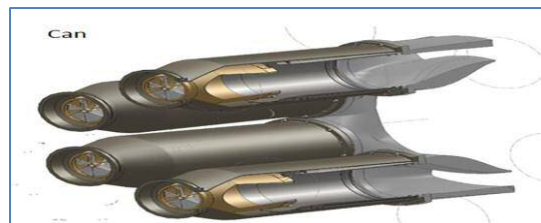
11 A cut section of the combustion chamber of a gas turbine [8]
